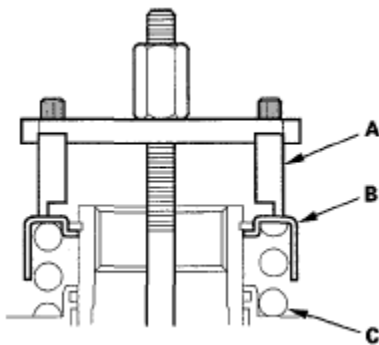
Identifying Clutch Spring Compressor Attachment, Spring Retainer And Clutch Return Spring
